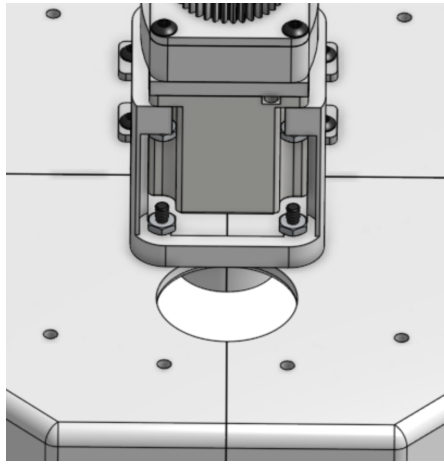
Carousel motor and gearbox assembly aligned above the base's center bore.
